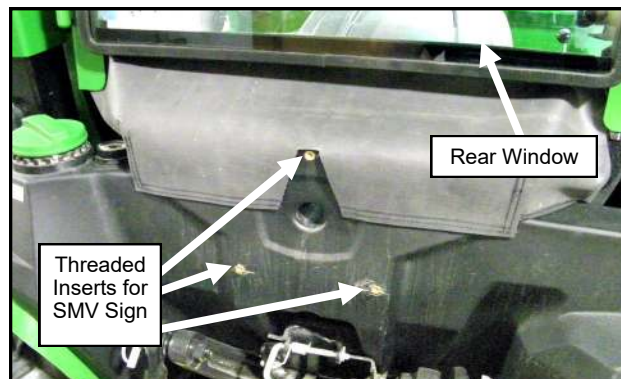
(Rear Filler Behind Fuel Tank)
